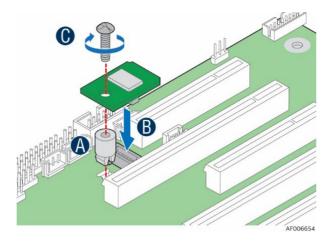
Platform Module (TPM) Installation – S2600CW Board Family
